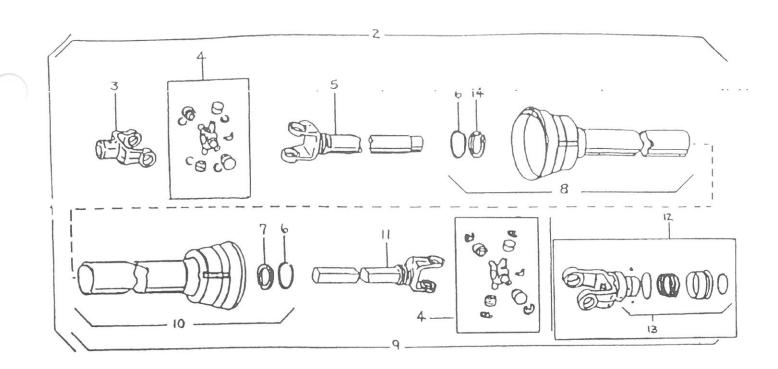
PTO PARTS HD NEEDLE BEARING PTO
